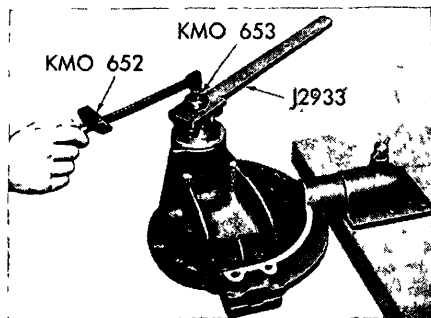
Measuring pinion bearing preload with a torque wrench, 1947-52
